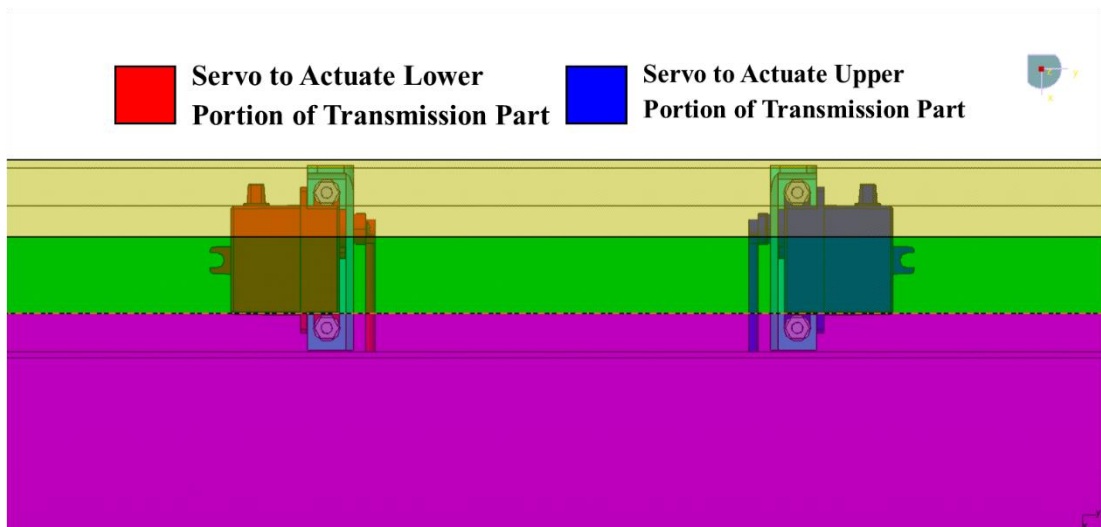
Top View of Servo Actuators in Open Cell Design – Zoomed View
